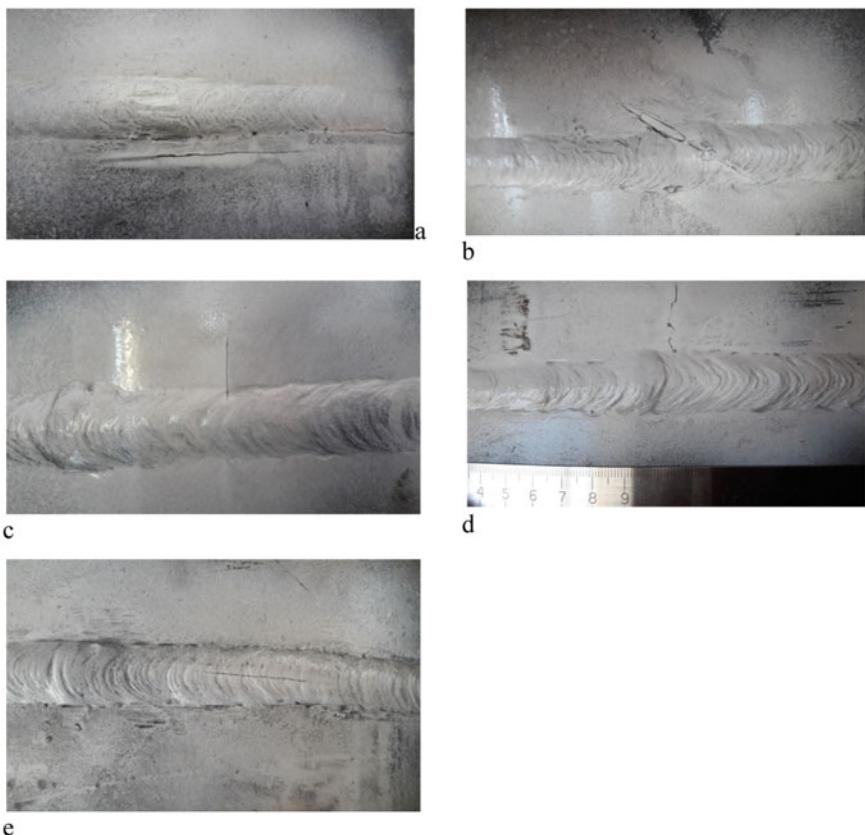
Photographs of samples with defects: a longitudinal crack in the HAZ; b branched crack in weld metal with transition to HAZ; c transverse crack in the HAZ; d transverse crack in the HAZ; e longitudinal crack in the weld metal
